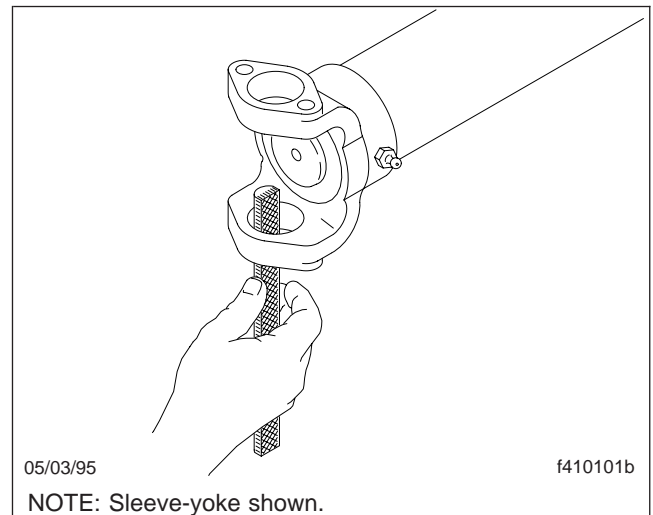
, Removing Burrs From a Full-Round Yoke Cross-Hole
